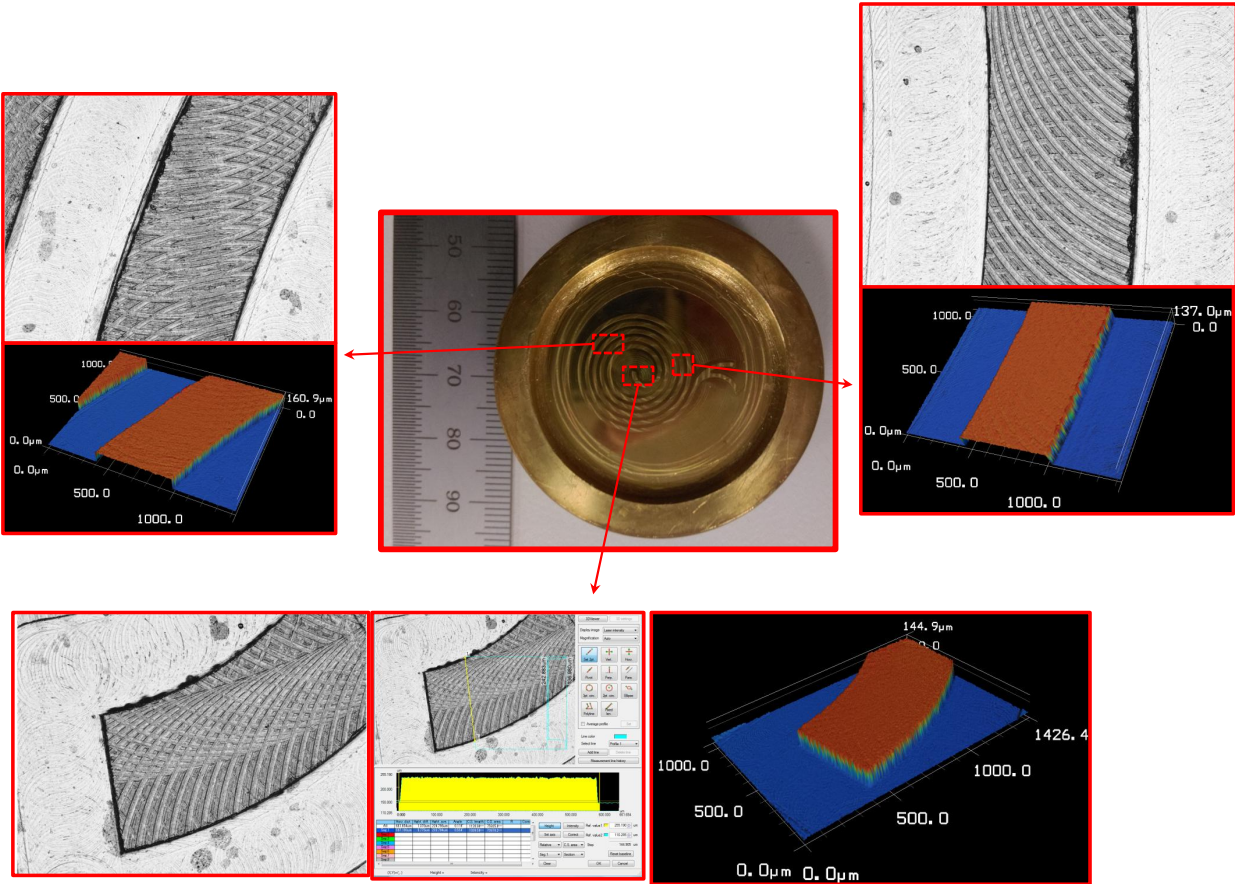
Spiral micro-channel metallic mold manufactured using micro-machining CNC machine together with laser microscope images
